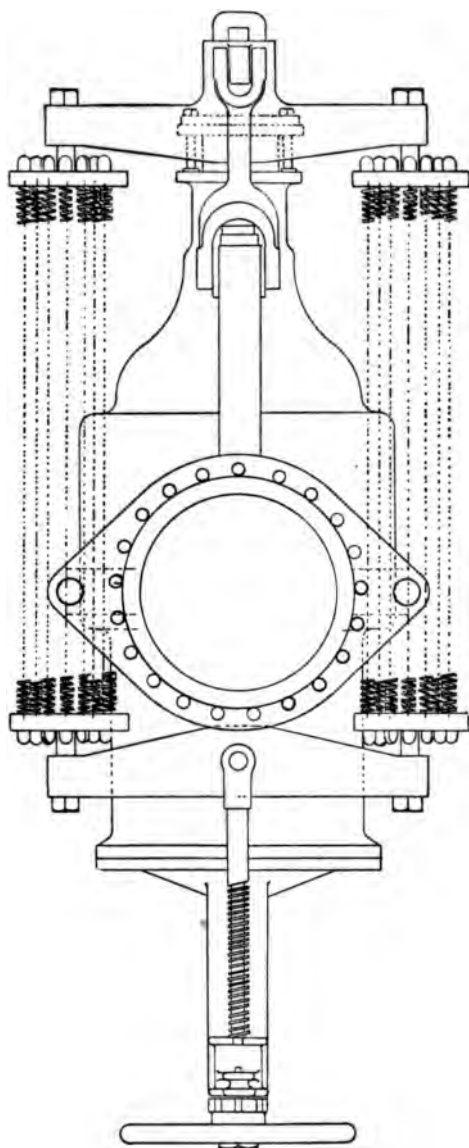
BELLEVILLE BOILER REDUCING VALVE.
